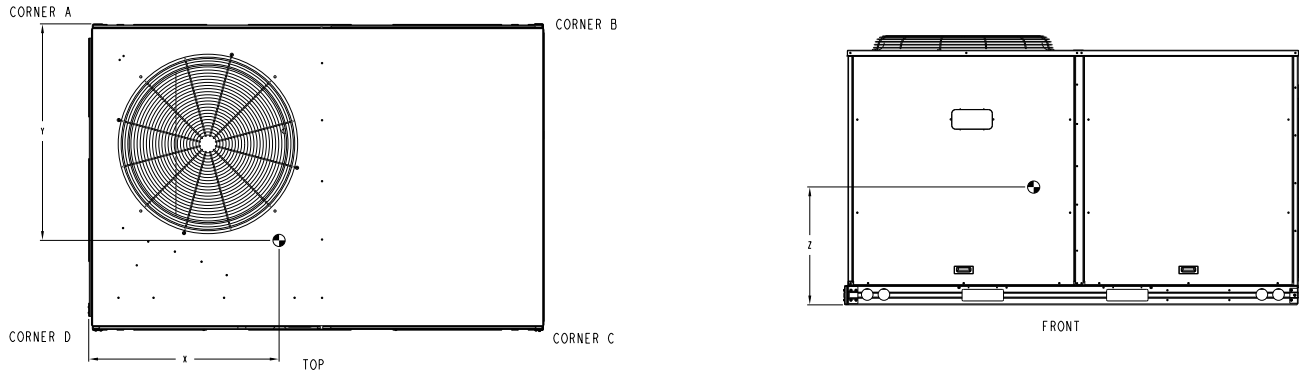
Dimensions RHH 102 (Sheet 1 of 2)
